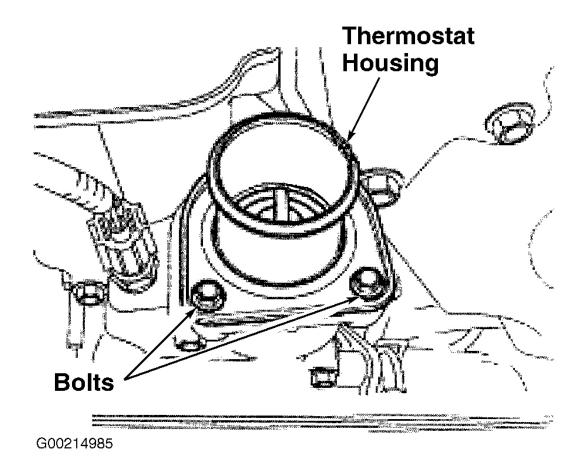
Removing & Installing Thermostat Housing (Excursion & "F" Series Shown; "E" Series Similar)
